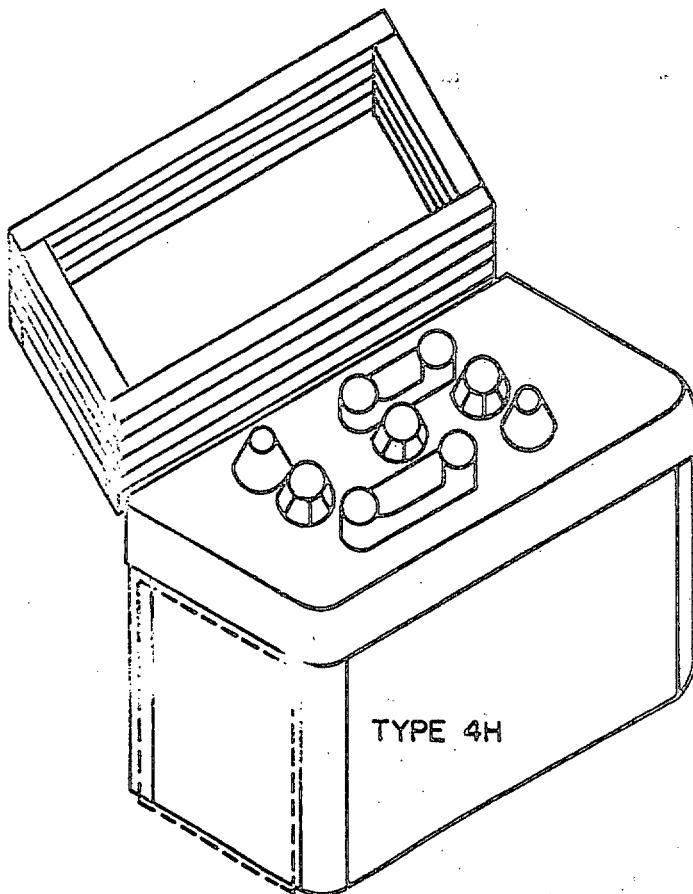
TOP FRAME FILLER AND ASSEMBLY
